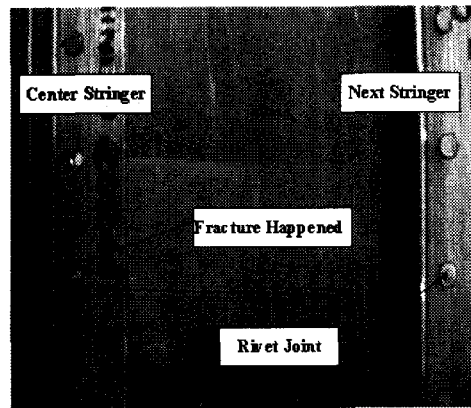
The photograph of the fracture in the center stringer, at the rivet hole just under the initial crack
